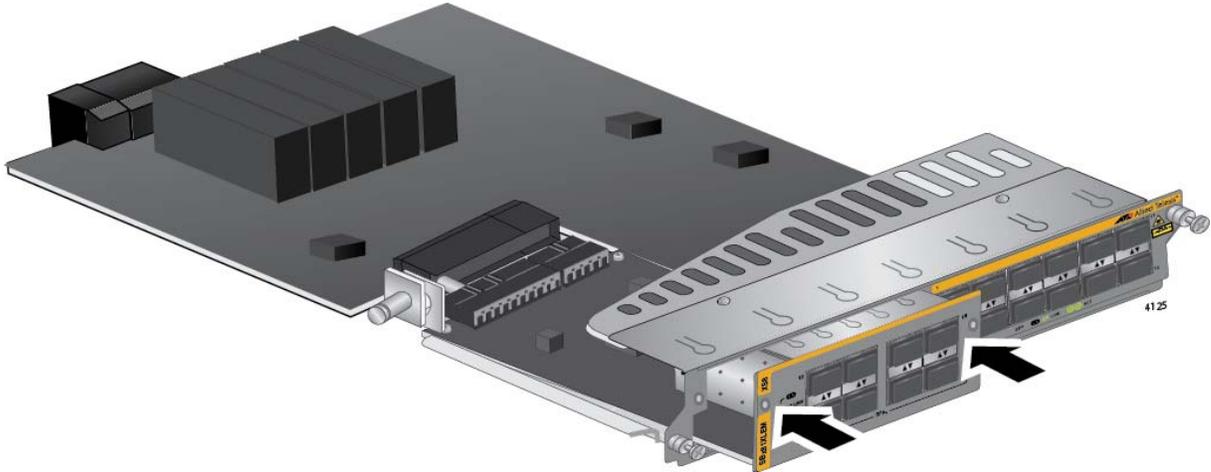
Seating the Expansion Module on the Connector in the AT-SBx81XLEM Line Card
